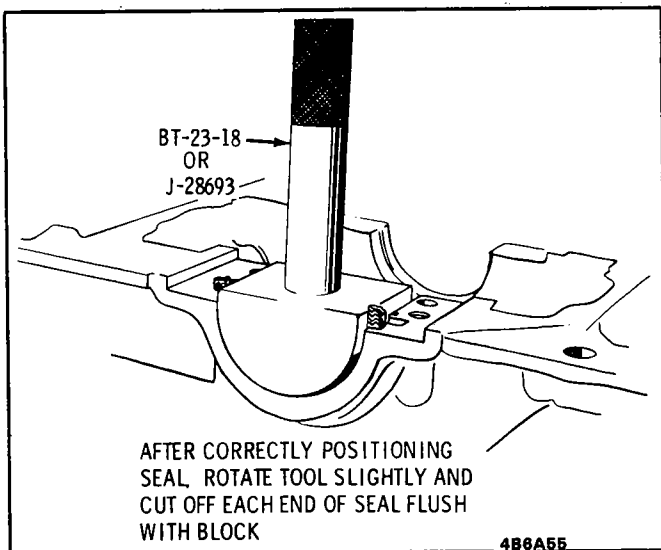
Installing Rear Main Bearing Oil Seal In Block
